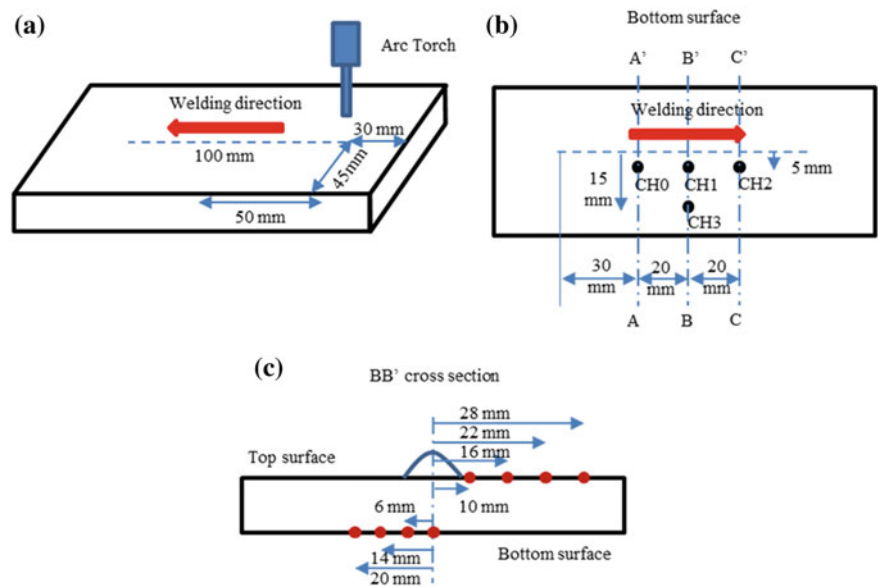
a Schematic of experiment setup; b cutting plane and thermocouple position; and c positions used to measure directional stress on the BB' cross section
